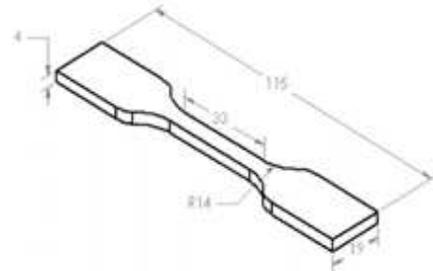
Test specimens, all dimensions are in mm: tensile test specimen
